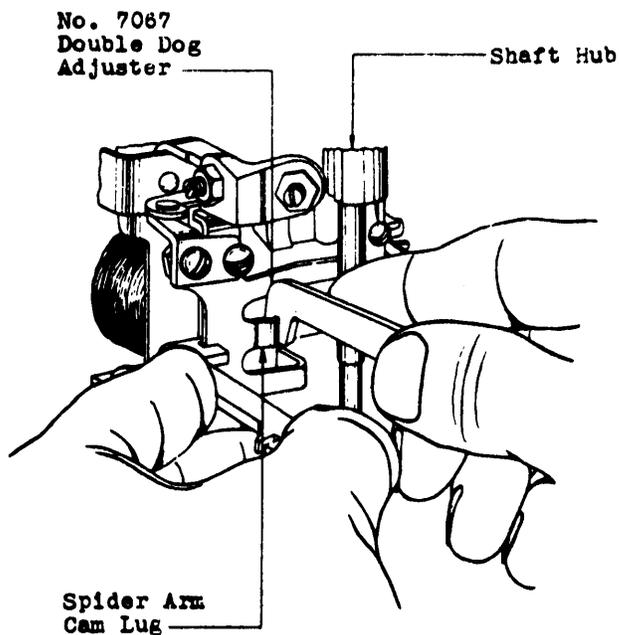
Method of Adjusting the Clearance Between the Spider Arm Cam Lug and the Shaft Hub
